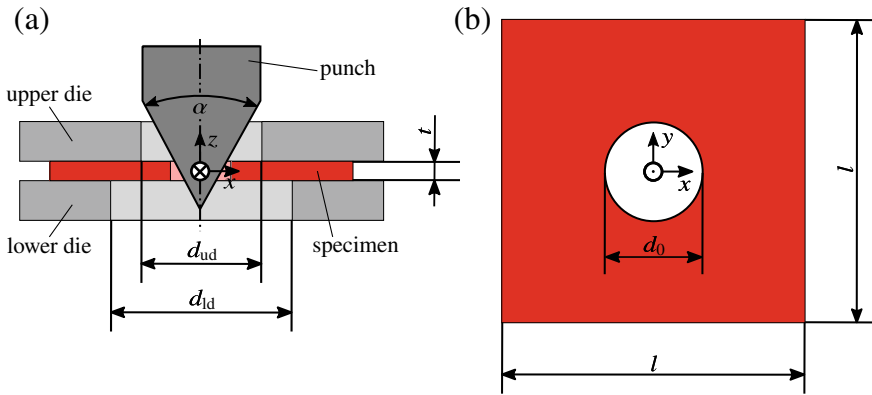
Schematic representation of test setup (a) and specimen (b): thickness, t , initial hole diameter, d_0 , and edge length, l , of specimen; inside diameter of upper die, d_{ud} , and lower die, d_{ld} ; punch tip angle, α
